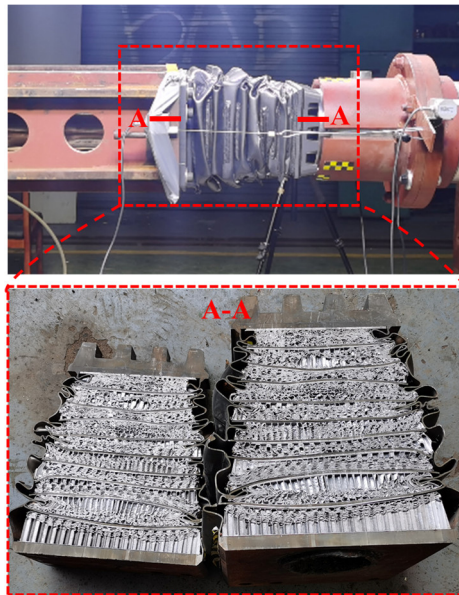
HGES after quasi-static compression test and cross-sectional view.
